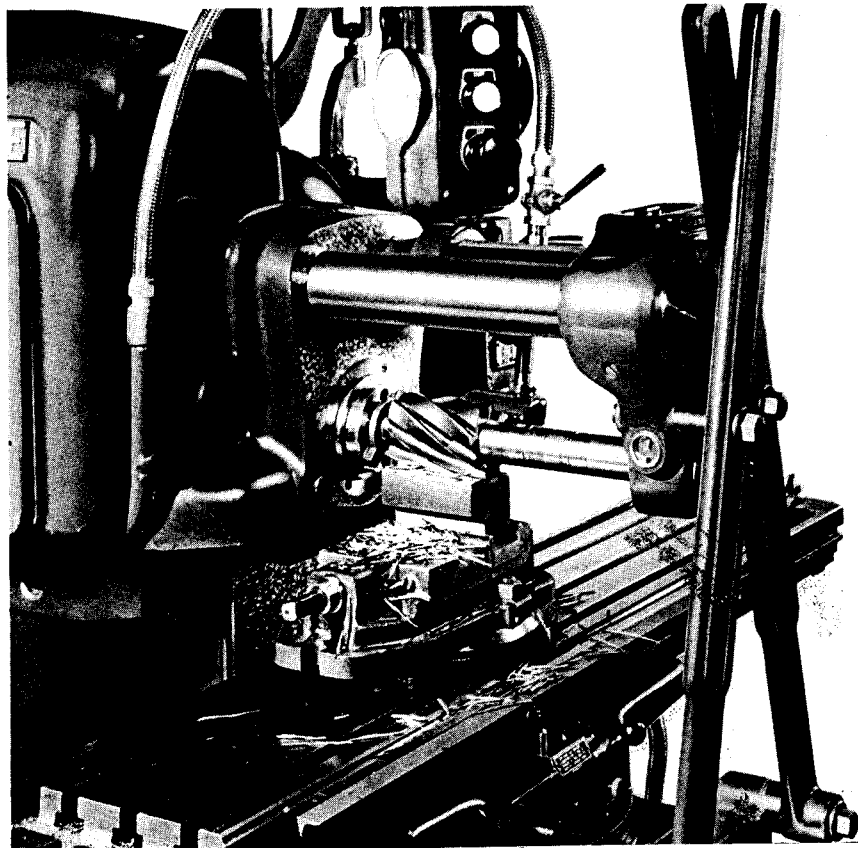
Using a coarse tooth plain milling cutter mounted close to the spindle nose gives a good surface finish.
